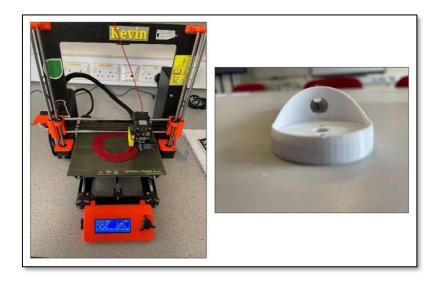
Manufacturing of the Robotics Arm parts with the *Prusa MK 3D Printer* and PLA material.
